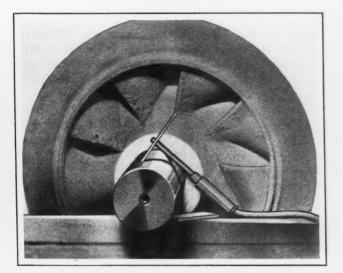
Wheel Shown in Fig. 4 Repaired by Welding
